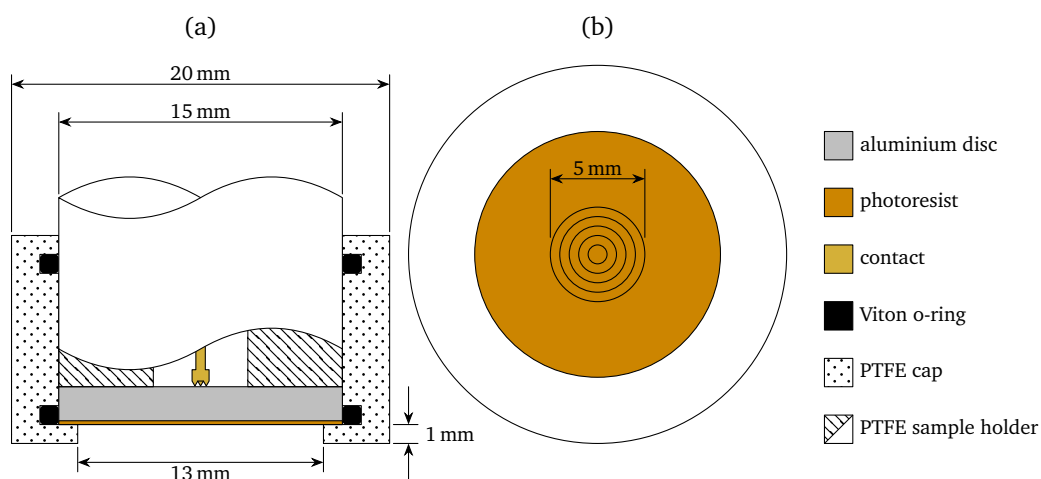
(a) Cross-sectional and (b) top view of the recessed RDE, showing the test pattern to be machined consisting of five concentric rings. Photoresist thickness is exaggerated drastically.
